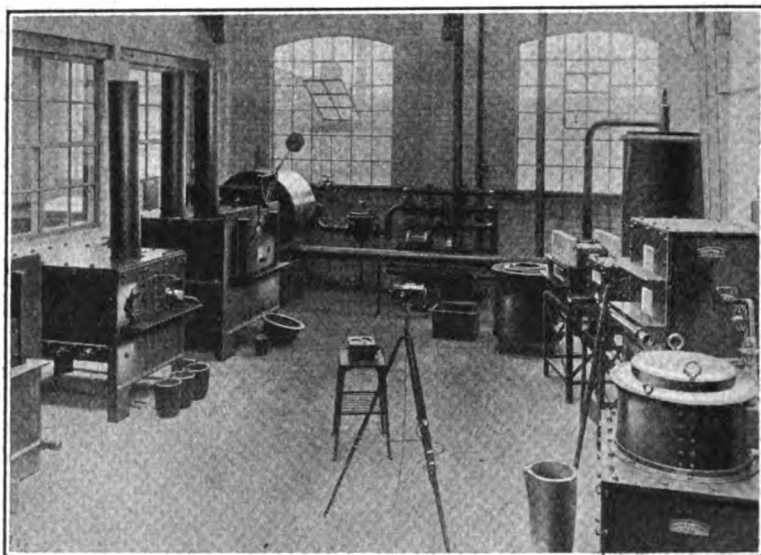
CORNER OF FURNACE TEST AND DEMONSTRATION ROOM.
